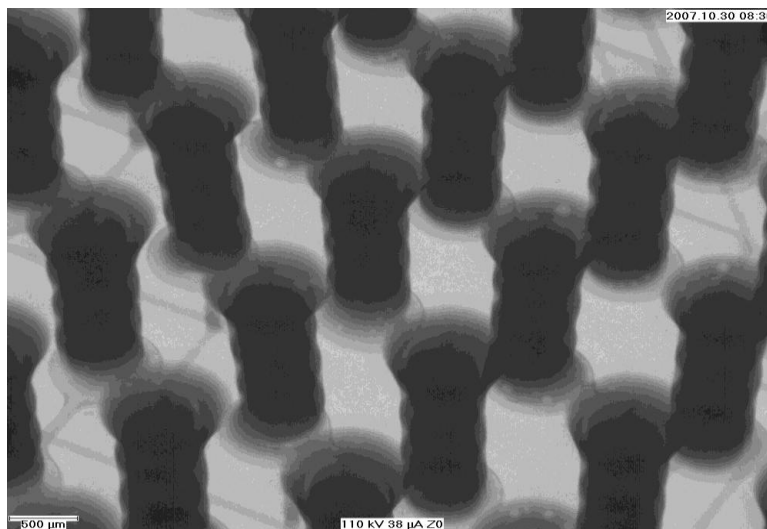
Example of a Tilted X-ray View Showing an Acceptable Level of Voiding in the Solder Joints
